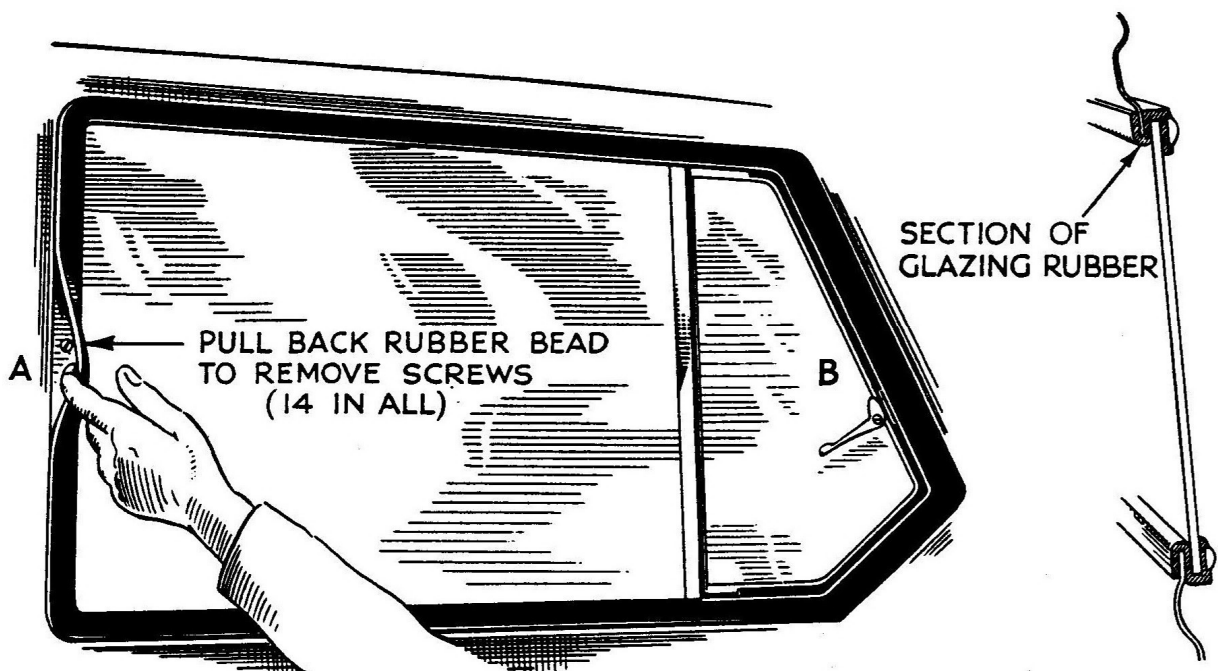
Showing the rear quarter light rubber beading turned back to expose one of the fourteen Barker Kalon drive screws.
